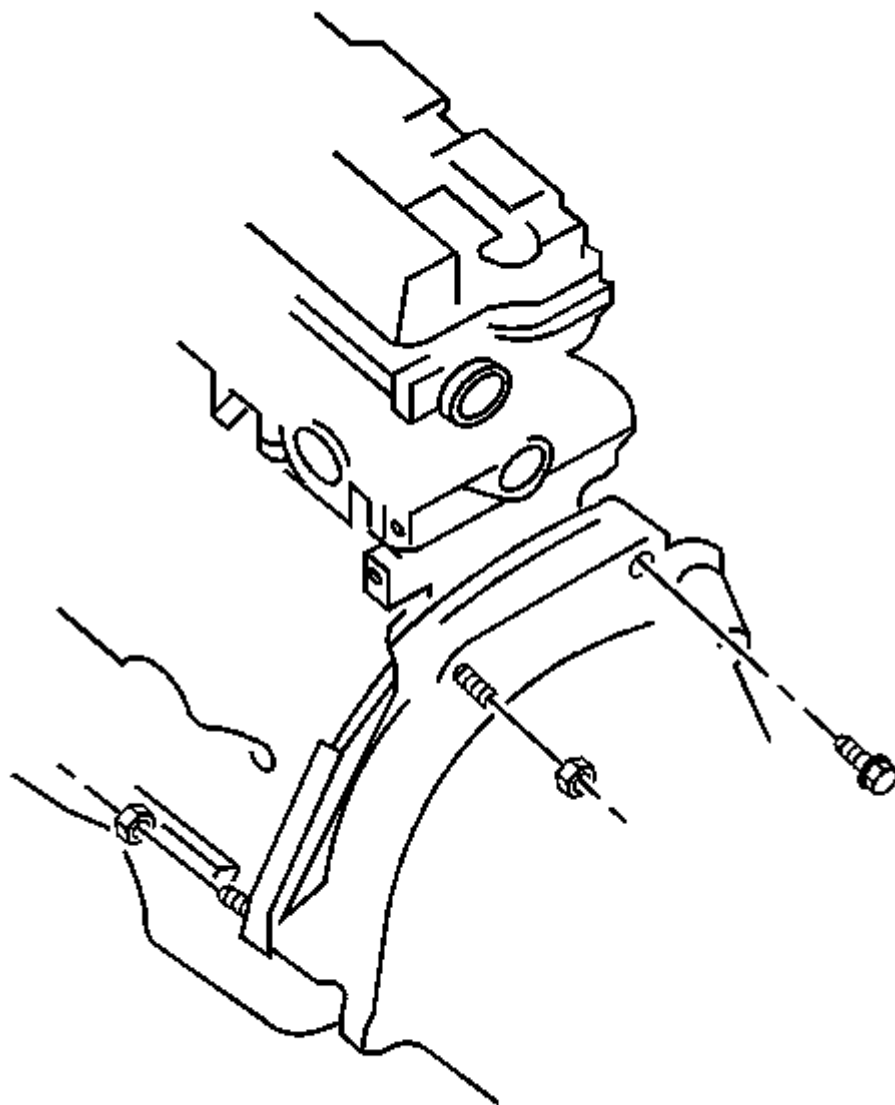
View Of Cylinder Block-To-Transmission Bolt & Nuts
